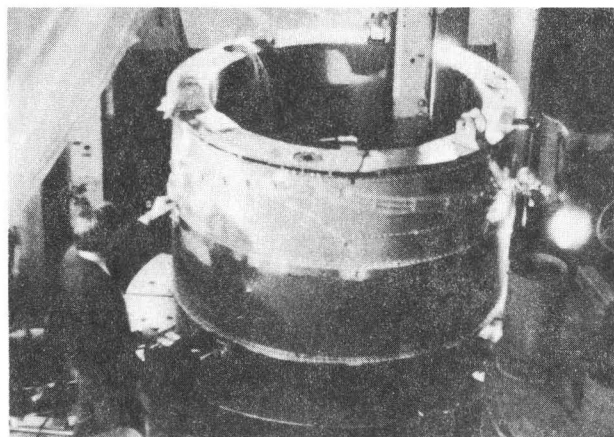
Final view of the superconducting coil just before welding on outer stainless steel wall to seal the helium can. The coil leads form a tracklike pattern on the outer surface. A final test for grounds is being performed.
